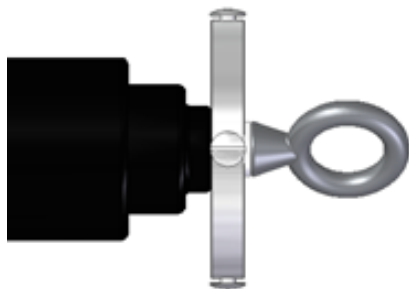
Motor Retention System¹ *The eyebolt is inserted through the retaining bulkhead, which is bolted to the body tube and threaded into the motor.
